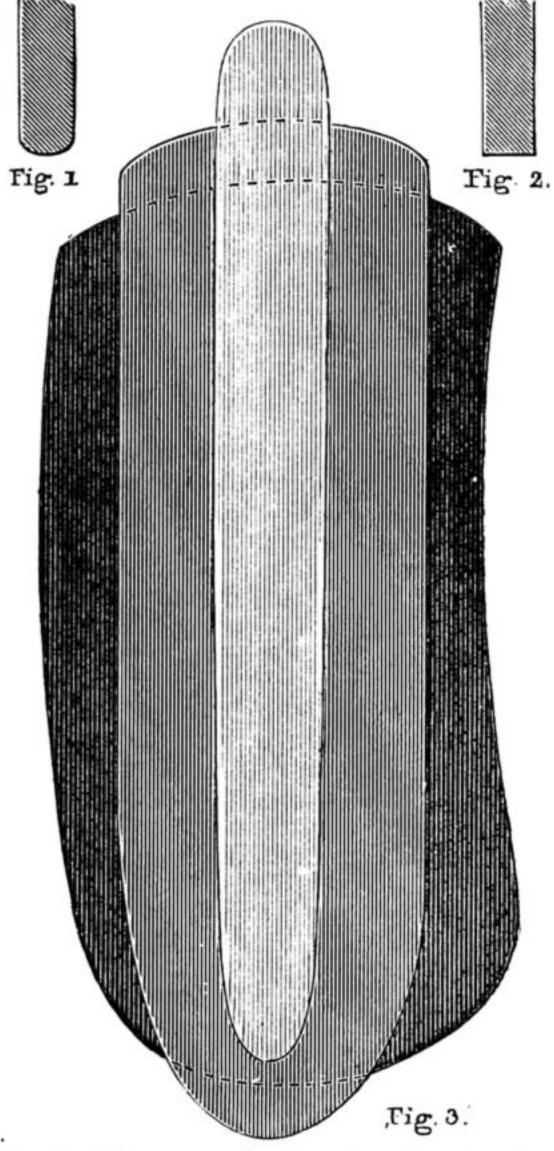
Edge wrongly formed. Fig. 2.—Edge rightly formed. Fig. 3.—Outlines of Shaped Scrapers.
